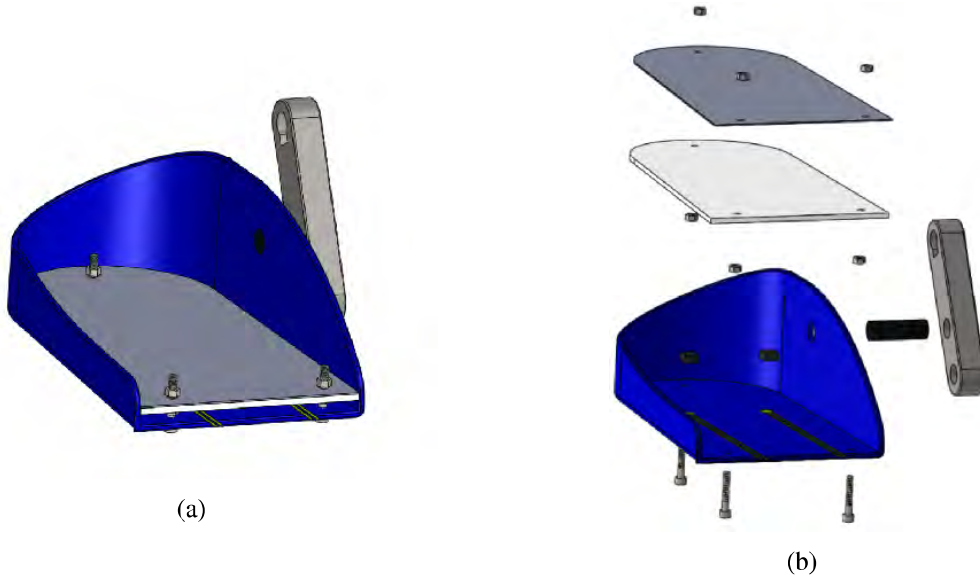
Tridimensional model of the system to measure the applied force. Representation of (a) the mounted view and (b) the exploded view of the mechanical system.
